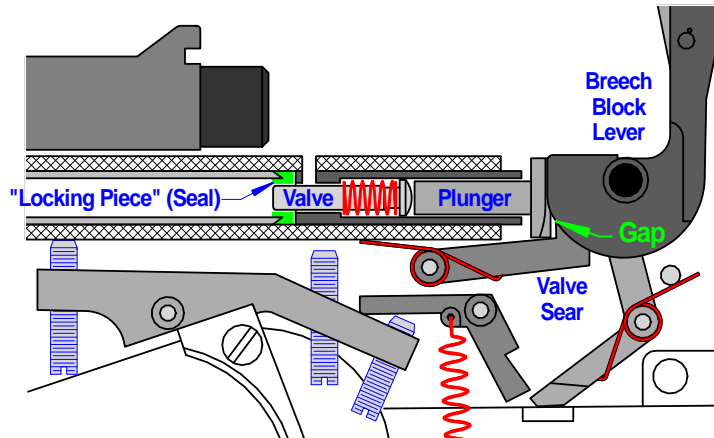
Valve plunger & valve held forward by breech block lever during pump stroke
